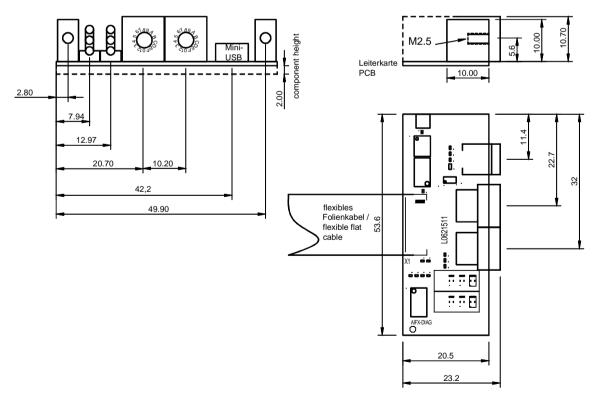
Dimensioning Diagnostic Assembly Interface (AIFX-DIAG)
